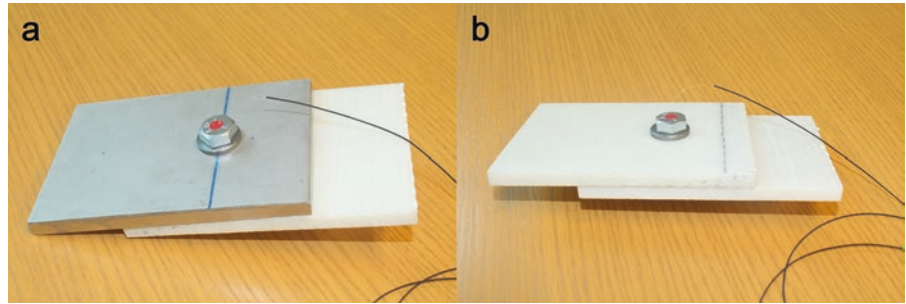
Assembled bolted joints: (a) steel-GFRP configuration, (b) GFRP-GFRP configuration
